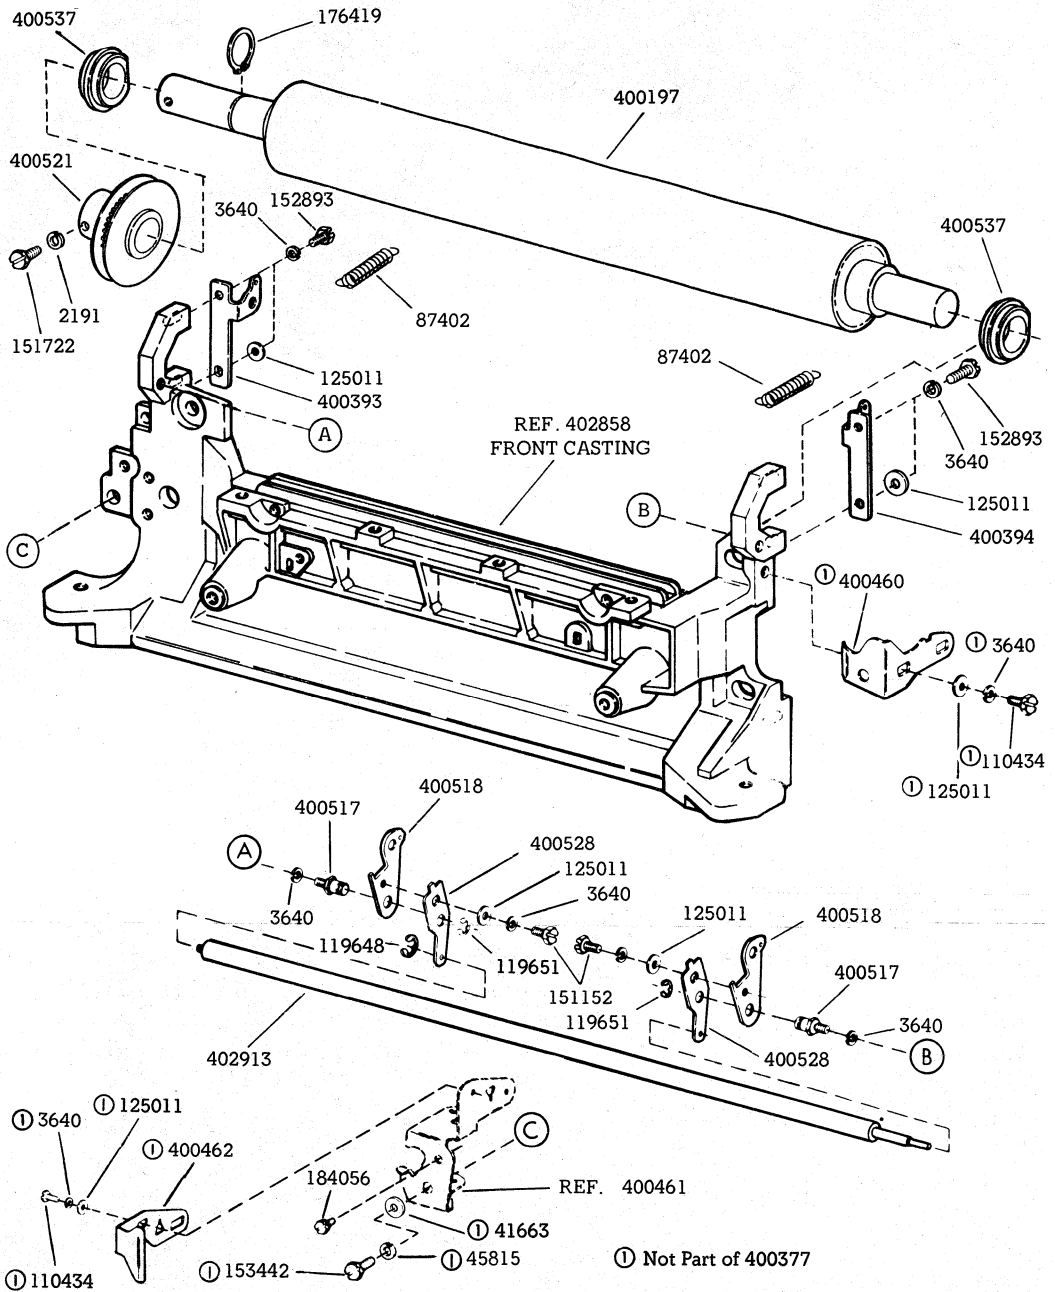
Front Casting Assembly (Friction Feed 40P101 - Late Design) (Cont.)
